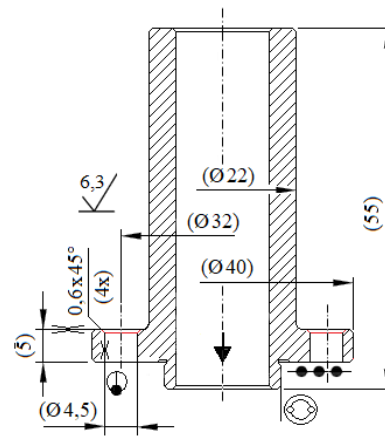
Sketch of an operation including machining by countersinking, with magnetic fixturing of the part
